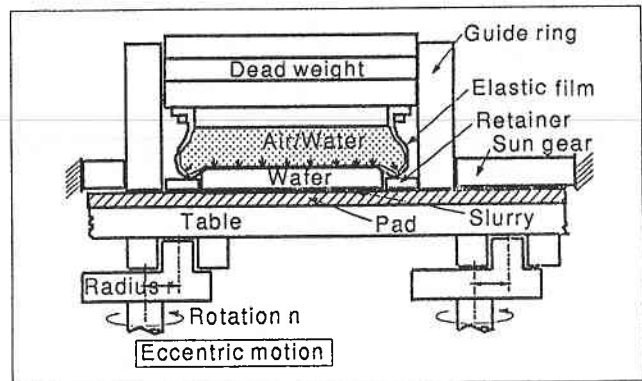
Schematic of developed polishing machine for uniform surface removal
